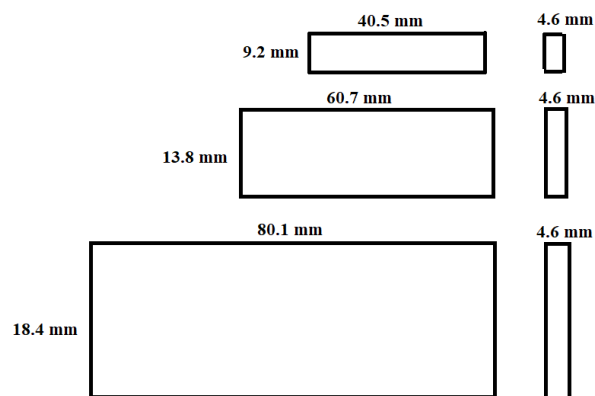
Fracture test specimen dimensions: small, medium and large, from top to bottom.
